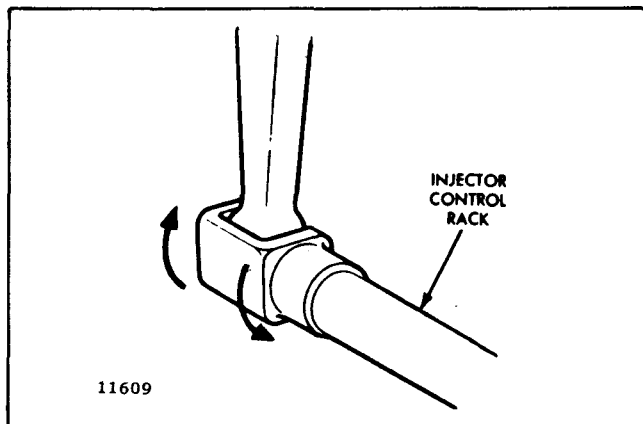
Checking Rotating Movement of Injector Control Rack
